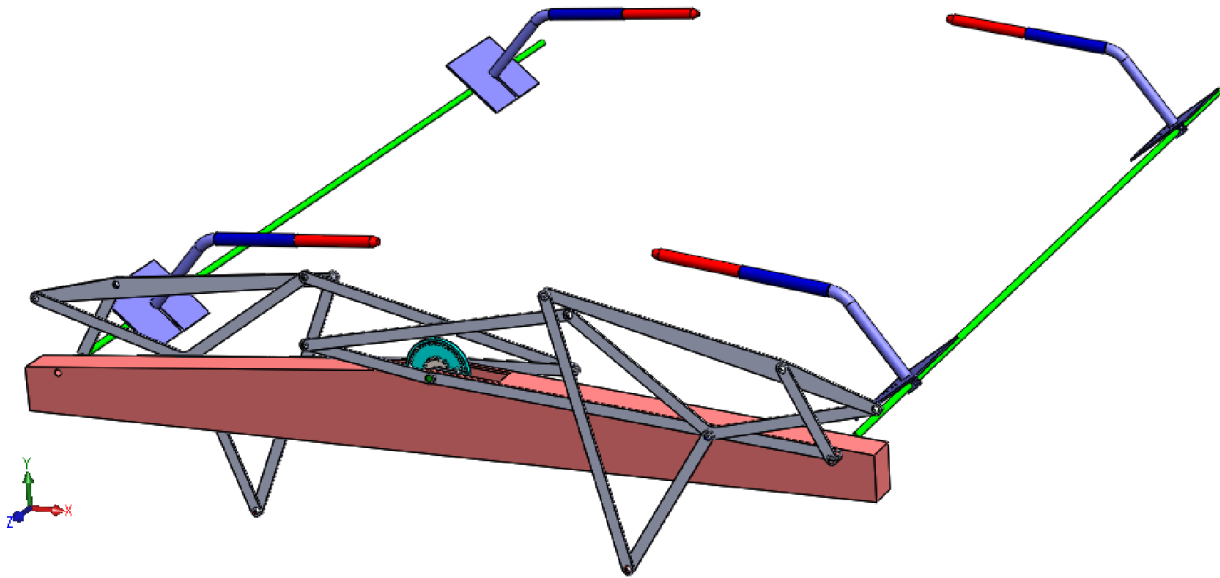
Side View of the Option – I Assembly Indicating the Ease of Enclosure of the Linkage Assembly from the Left Side
